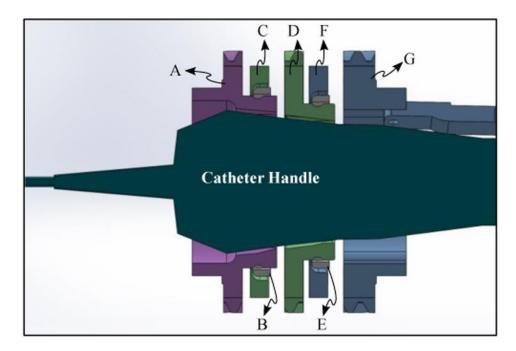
Cross-Sectional view showing knob interactions with the Catheter. Parts (A,B) enable yaw, parts (B,C,D,E) enable pitch, parts (E,F,G) enable roll.
